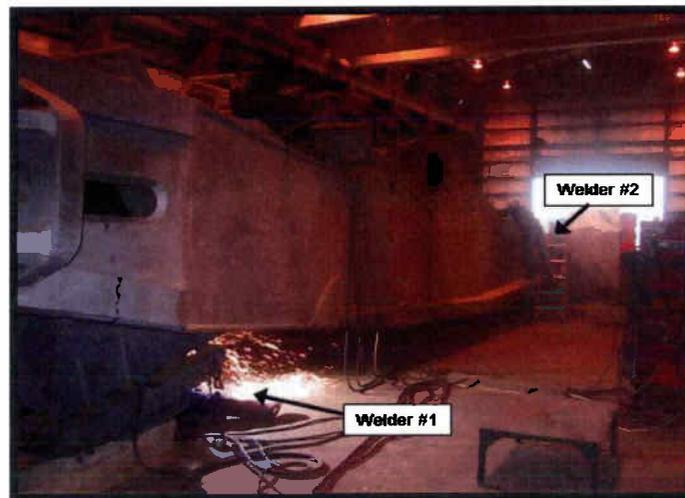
Two Welders Air-Arc Gouging on Coal Shovel Boom
